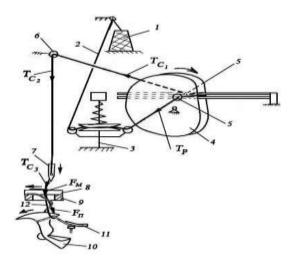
The process of cutting the upper thread loop with the upper thread take-up in the new method of obtaining a two-thread chain stitch, when the thread take-up starts to shorten the upper thread loop at 1850
